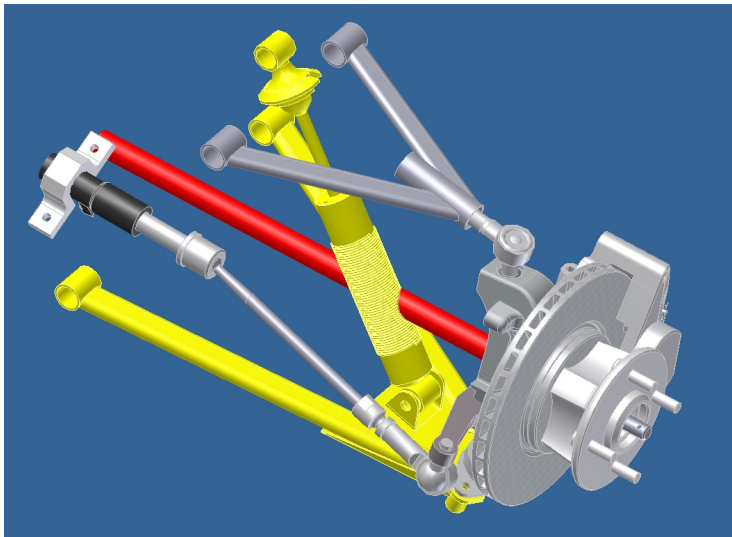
Sport Turbo Standard Front Suspension and Axle Line
